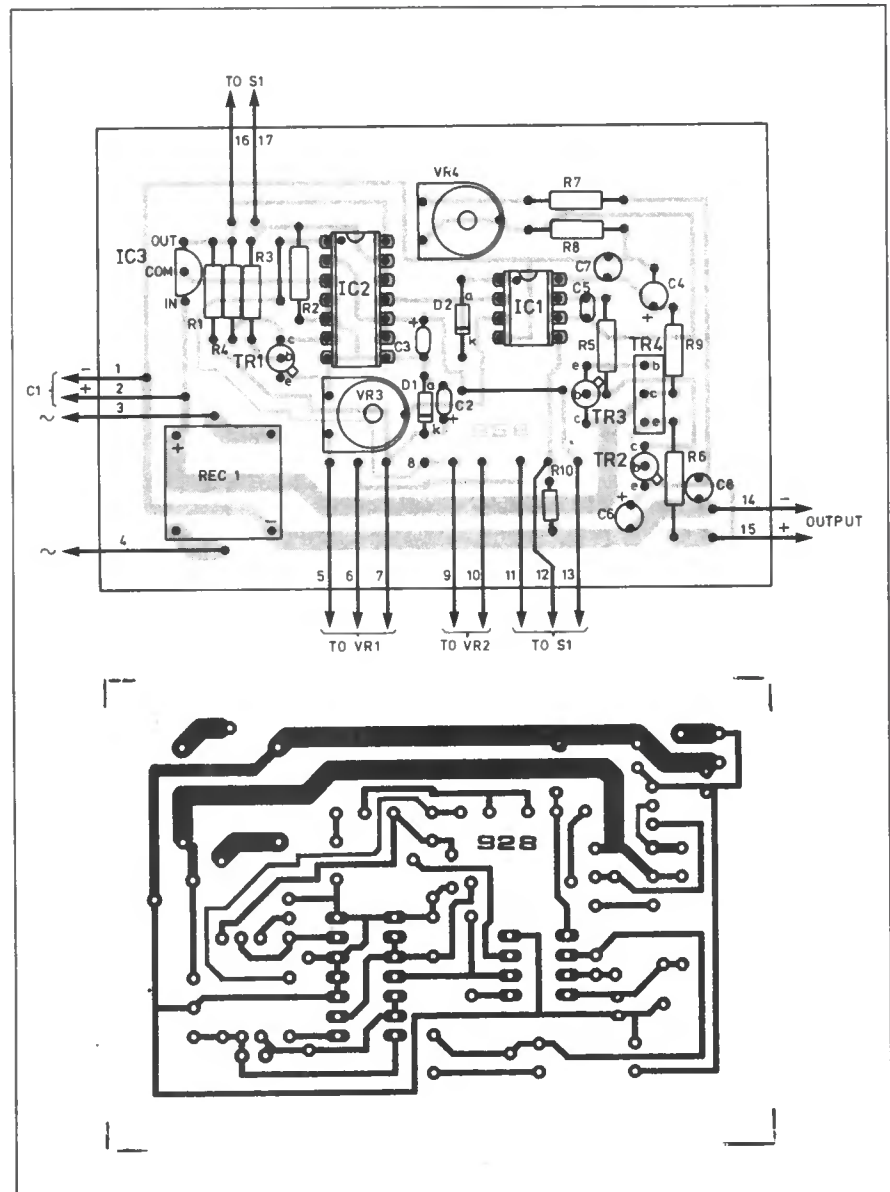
Printed circuit board component layout and full size copper foil master track pattern for the Foot-Operated Drill Controller.
